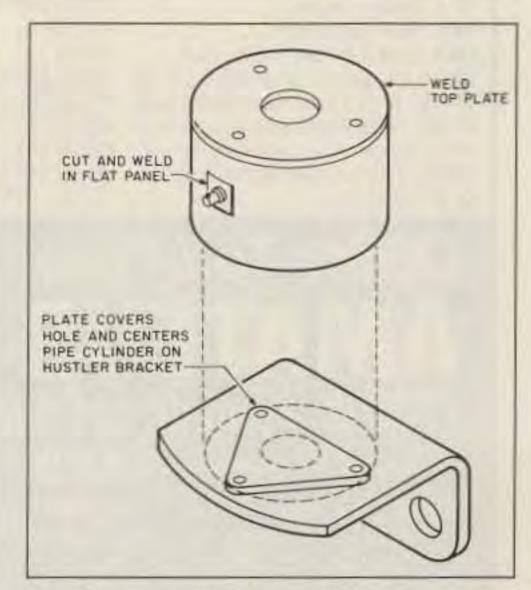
Lower plate covers hole in bracket and aids in centering the enclosure cylinder.
